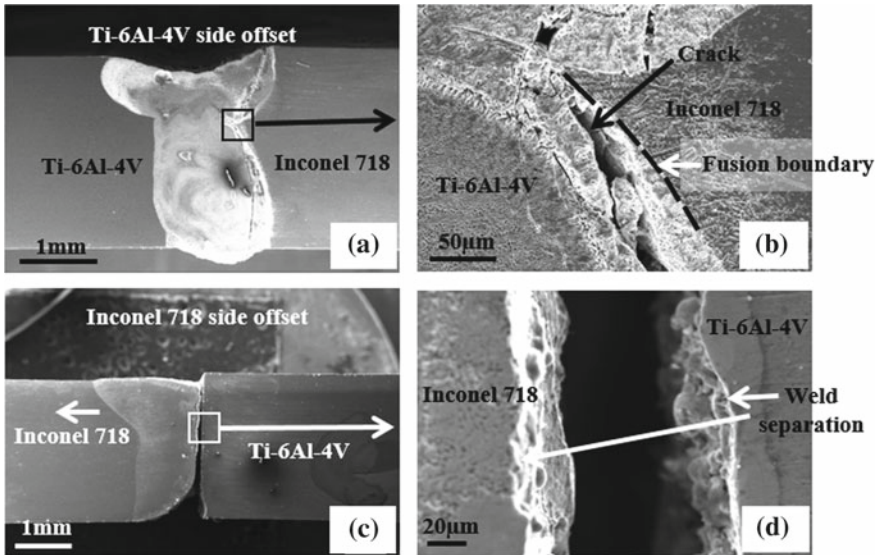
SEM image of a weld profile, b crack near Inconel base, for Ti6Al4V side offset-welded sample. SEM image of c Inconel 718 side weld profile, d Ti6Al4V side weld profile, for Inconel 718 side offset-welded sample
